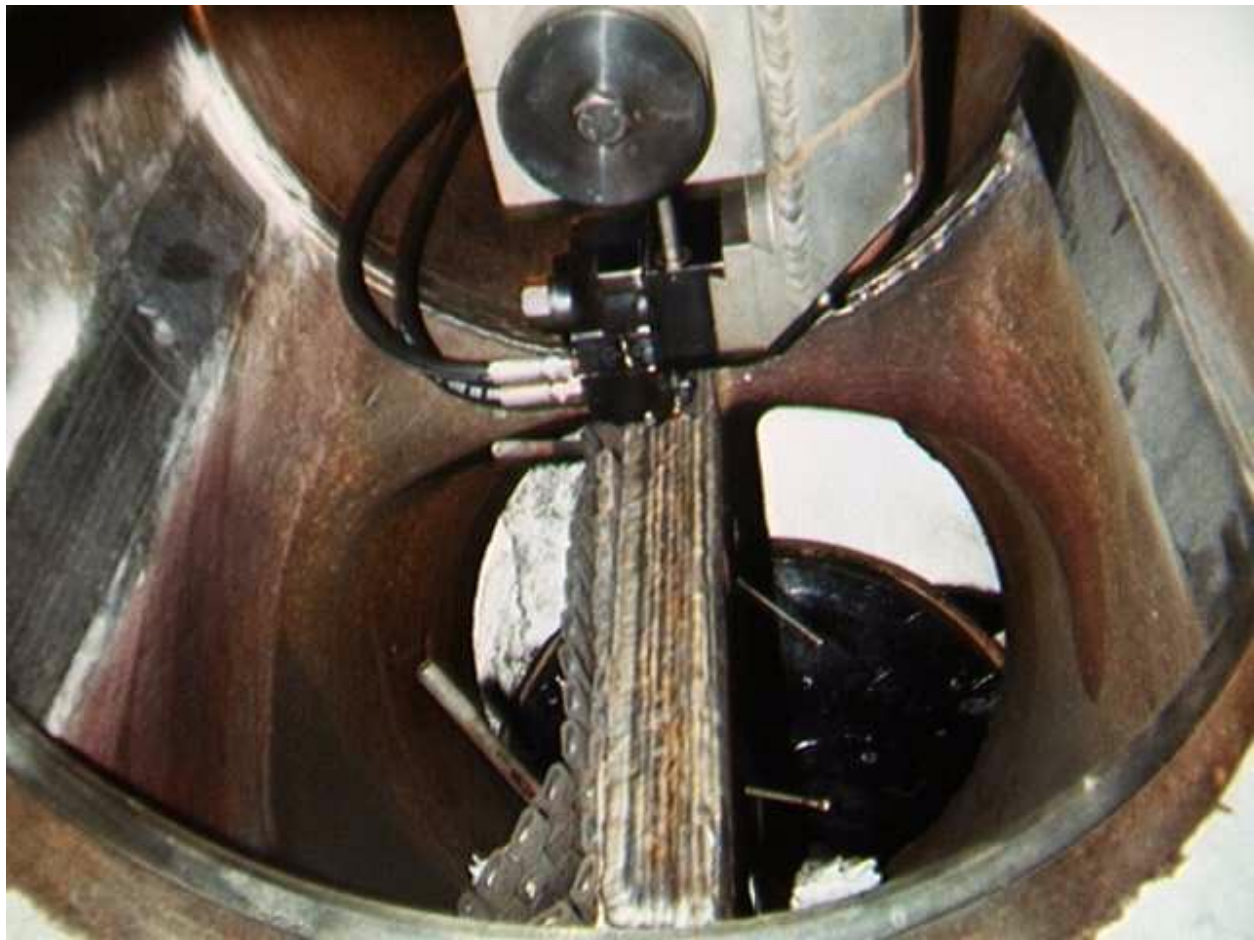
RFO8 Machining Mockup - Shaper Head
